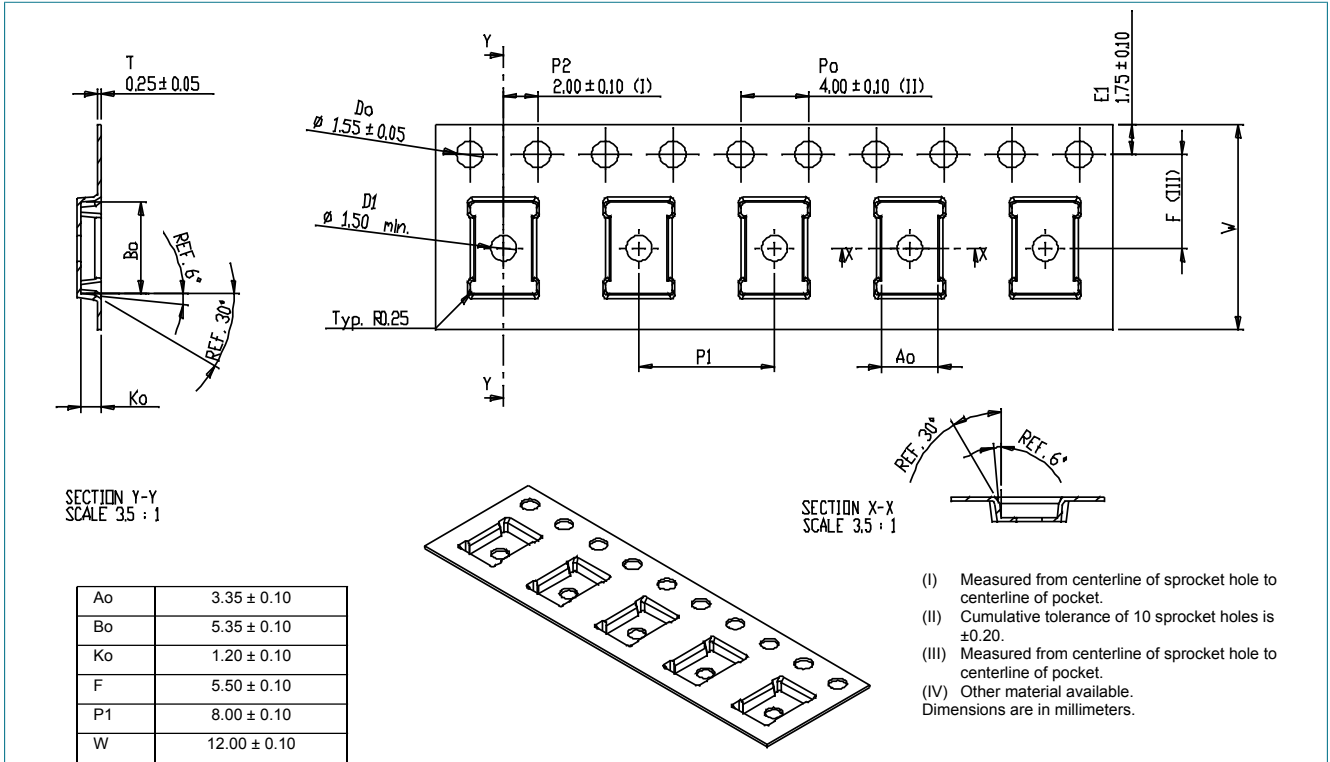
LGA 3 mm × 5 mm embossed carrier tape dimensions
